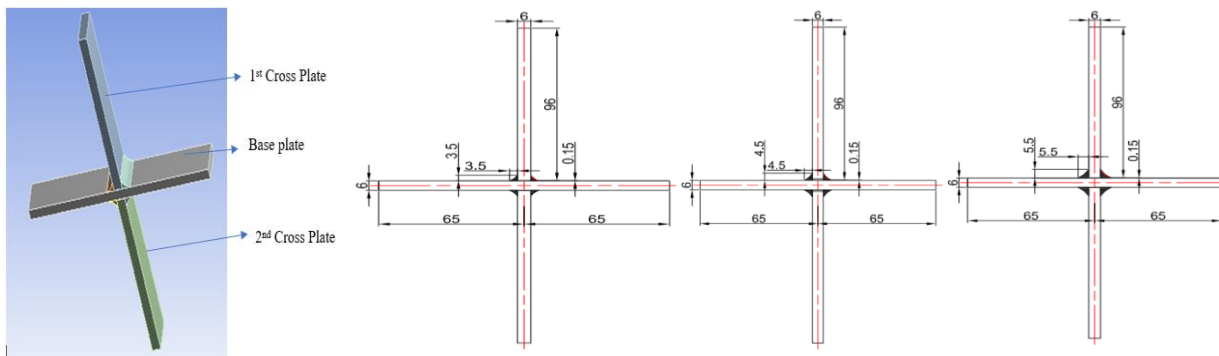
concave welded joint geometry for 3.5x3.5, 4.5x4.5 and 5.5x5.5 with considered dimensions.
